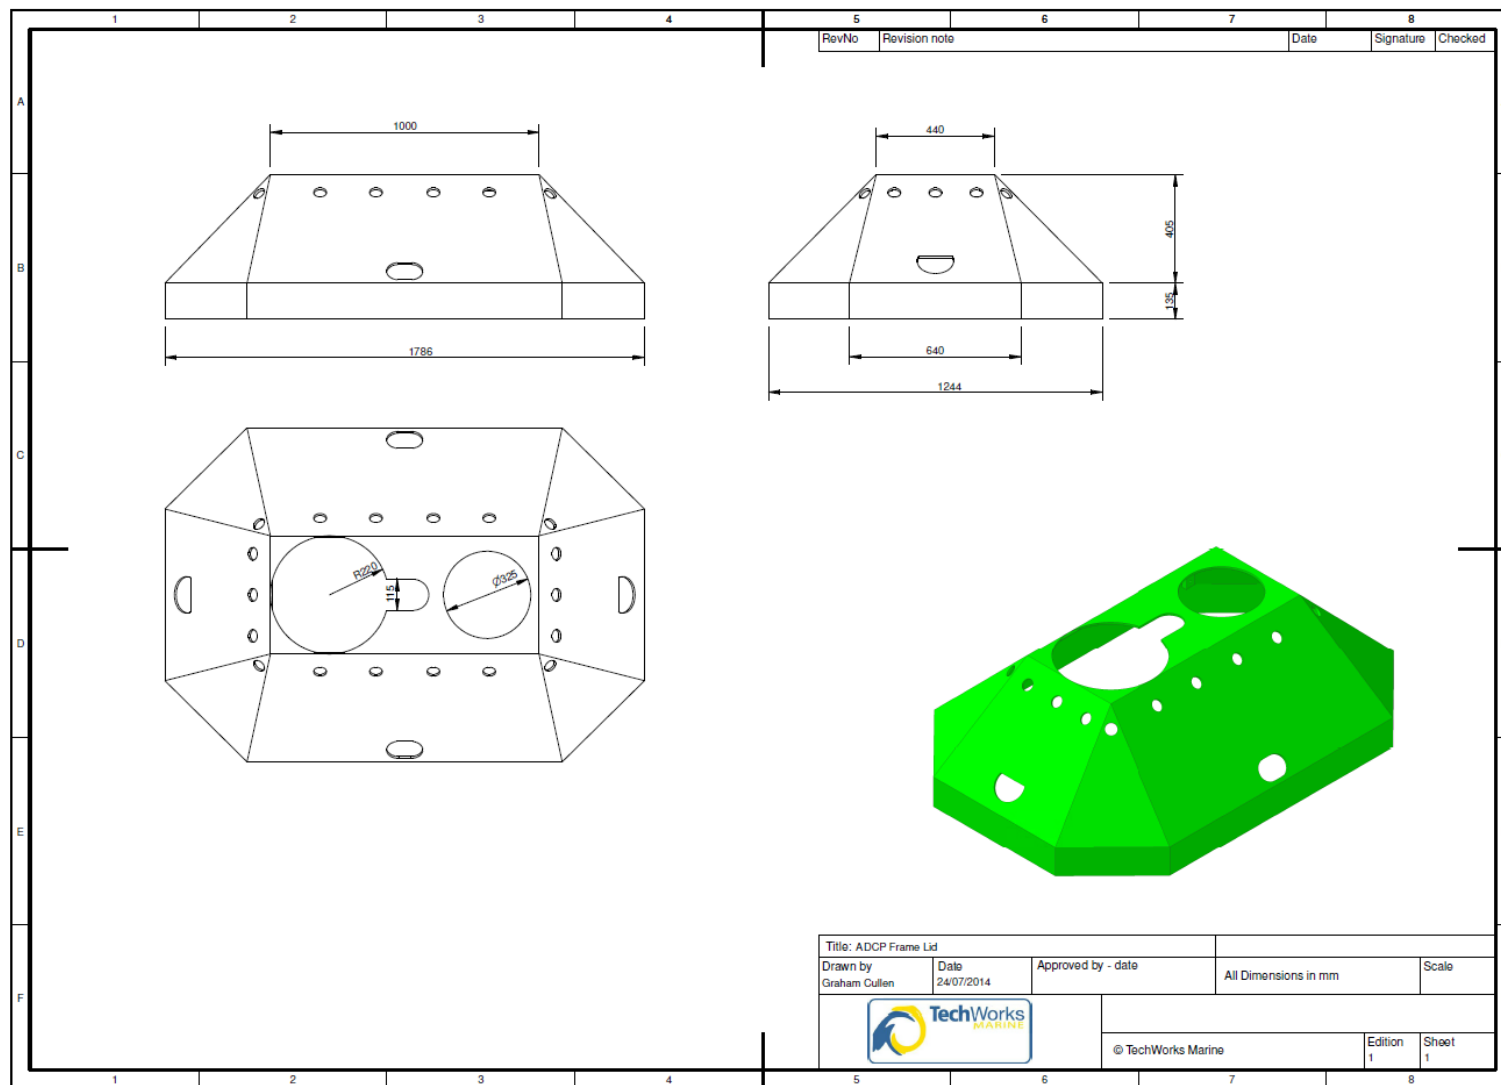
Typical detail drawing for an ADCP Frame (Ref: TechWorks Marine)
